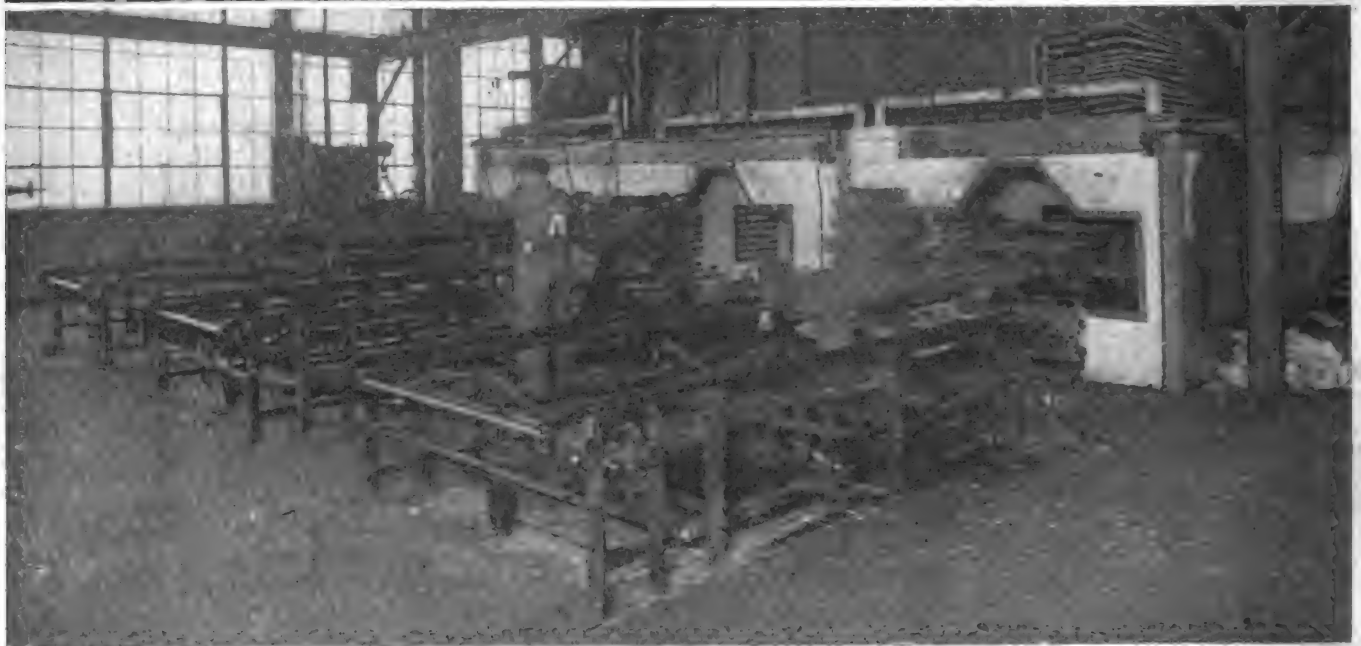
End of first assembly line, showing chassis emerging from drying oven, where they are lifted by overhead crane to platform and again sprayed.
